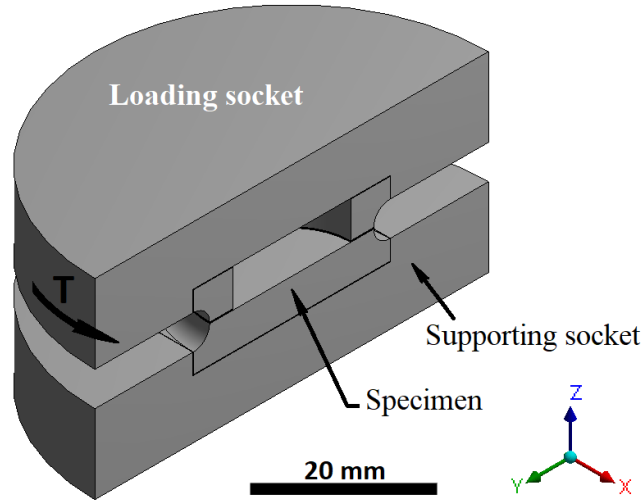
Schematic drawing of cross-section of square 3 hollow-3 full specimen in the sockets.
